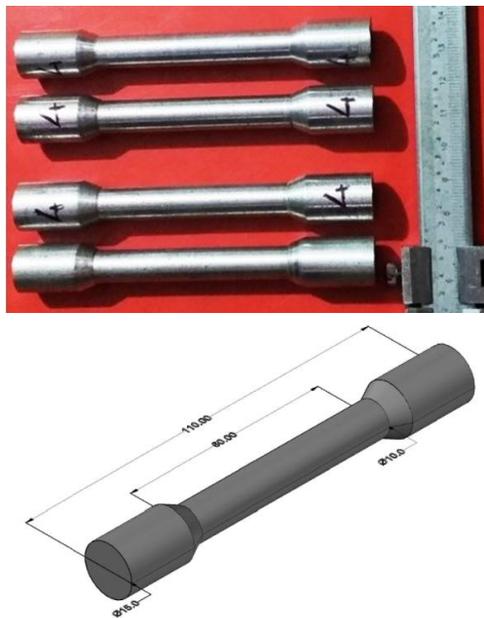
Dimensions of the tensile test sample as per ASTM-E8
